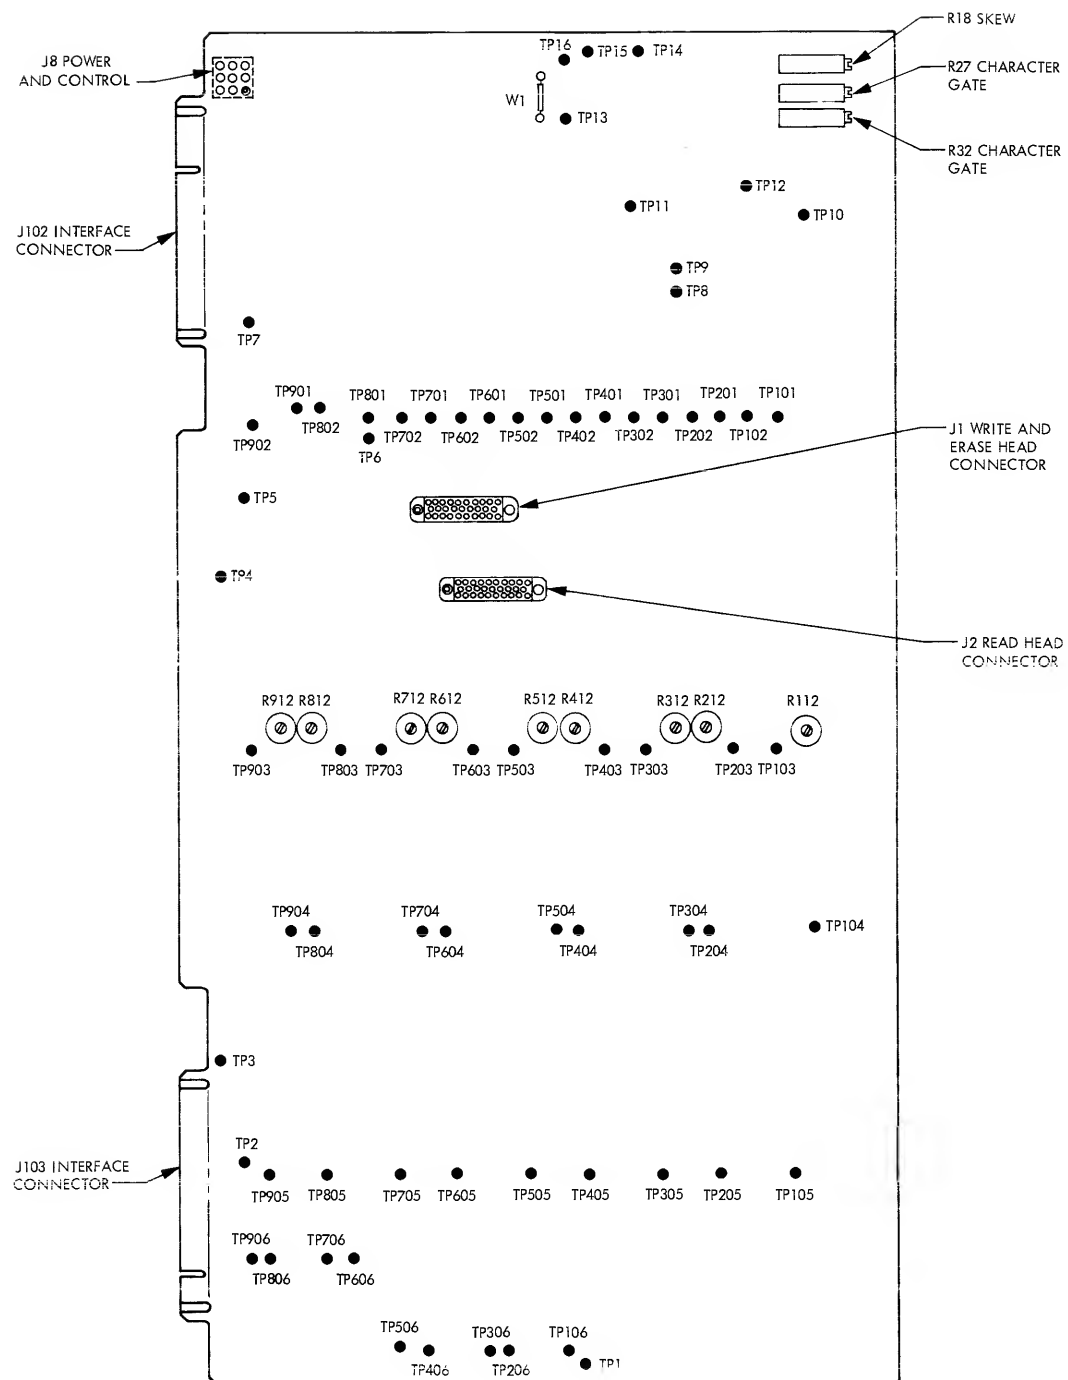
Data E19 PCBA, Test Point and Connector Placement
